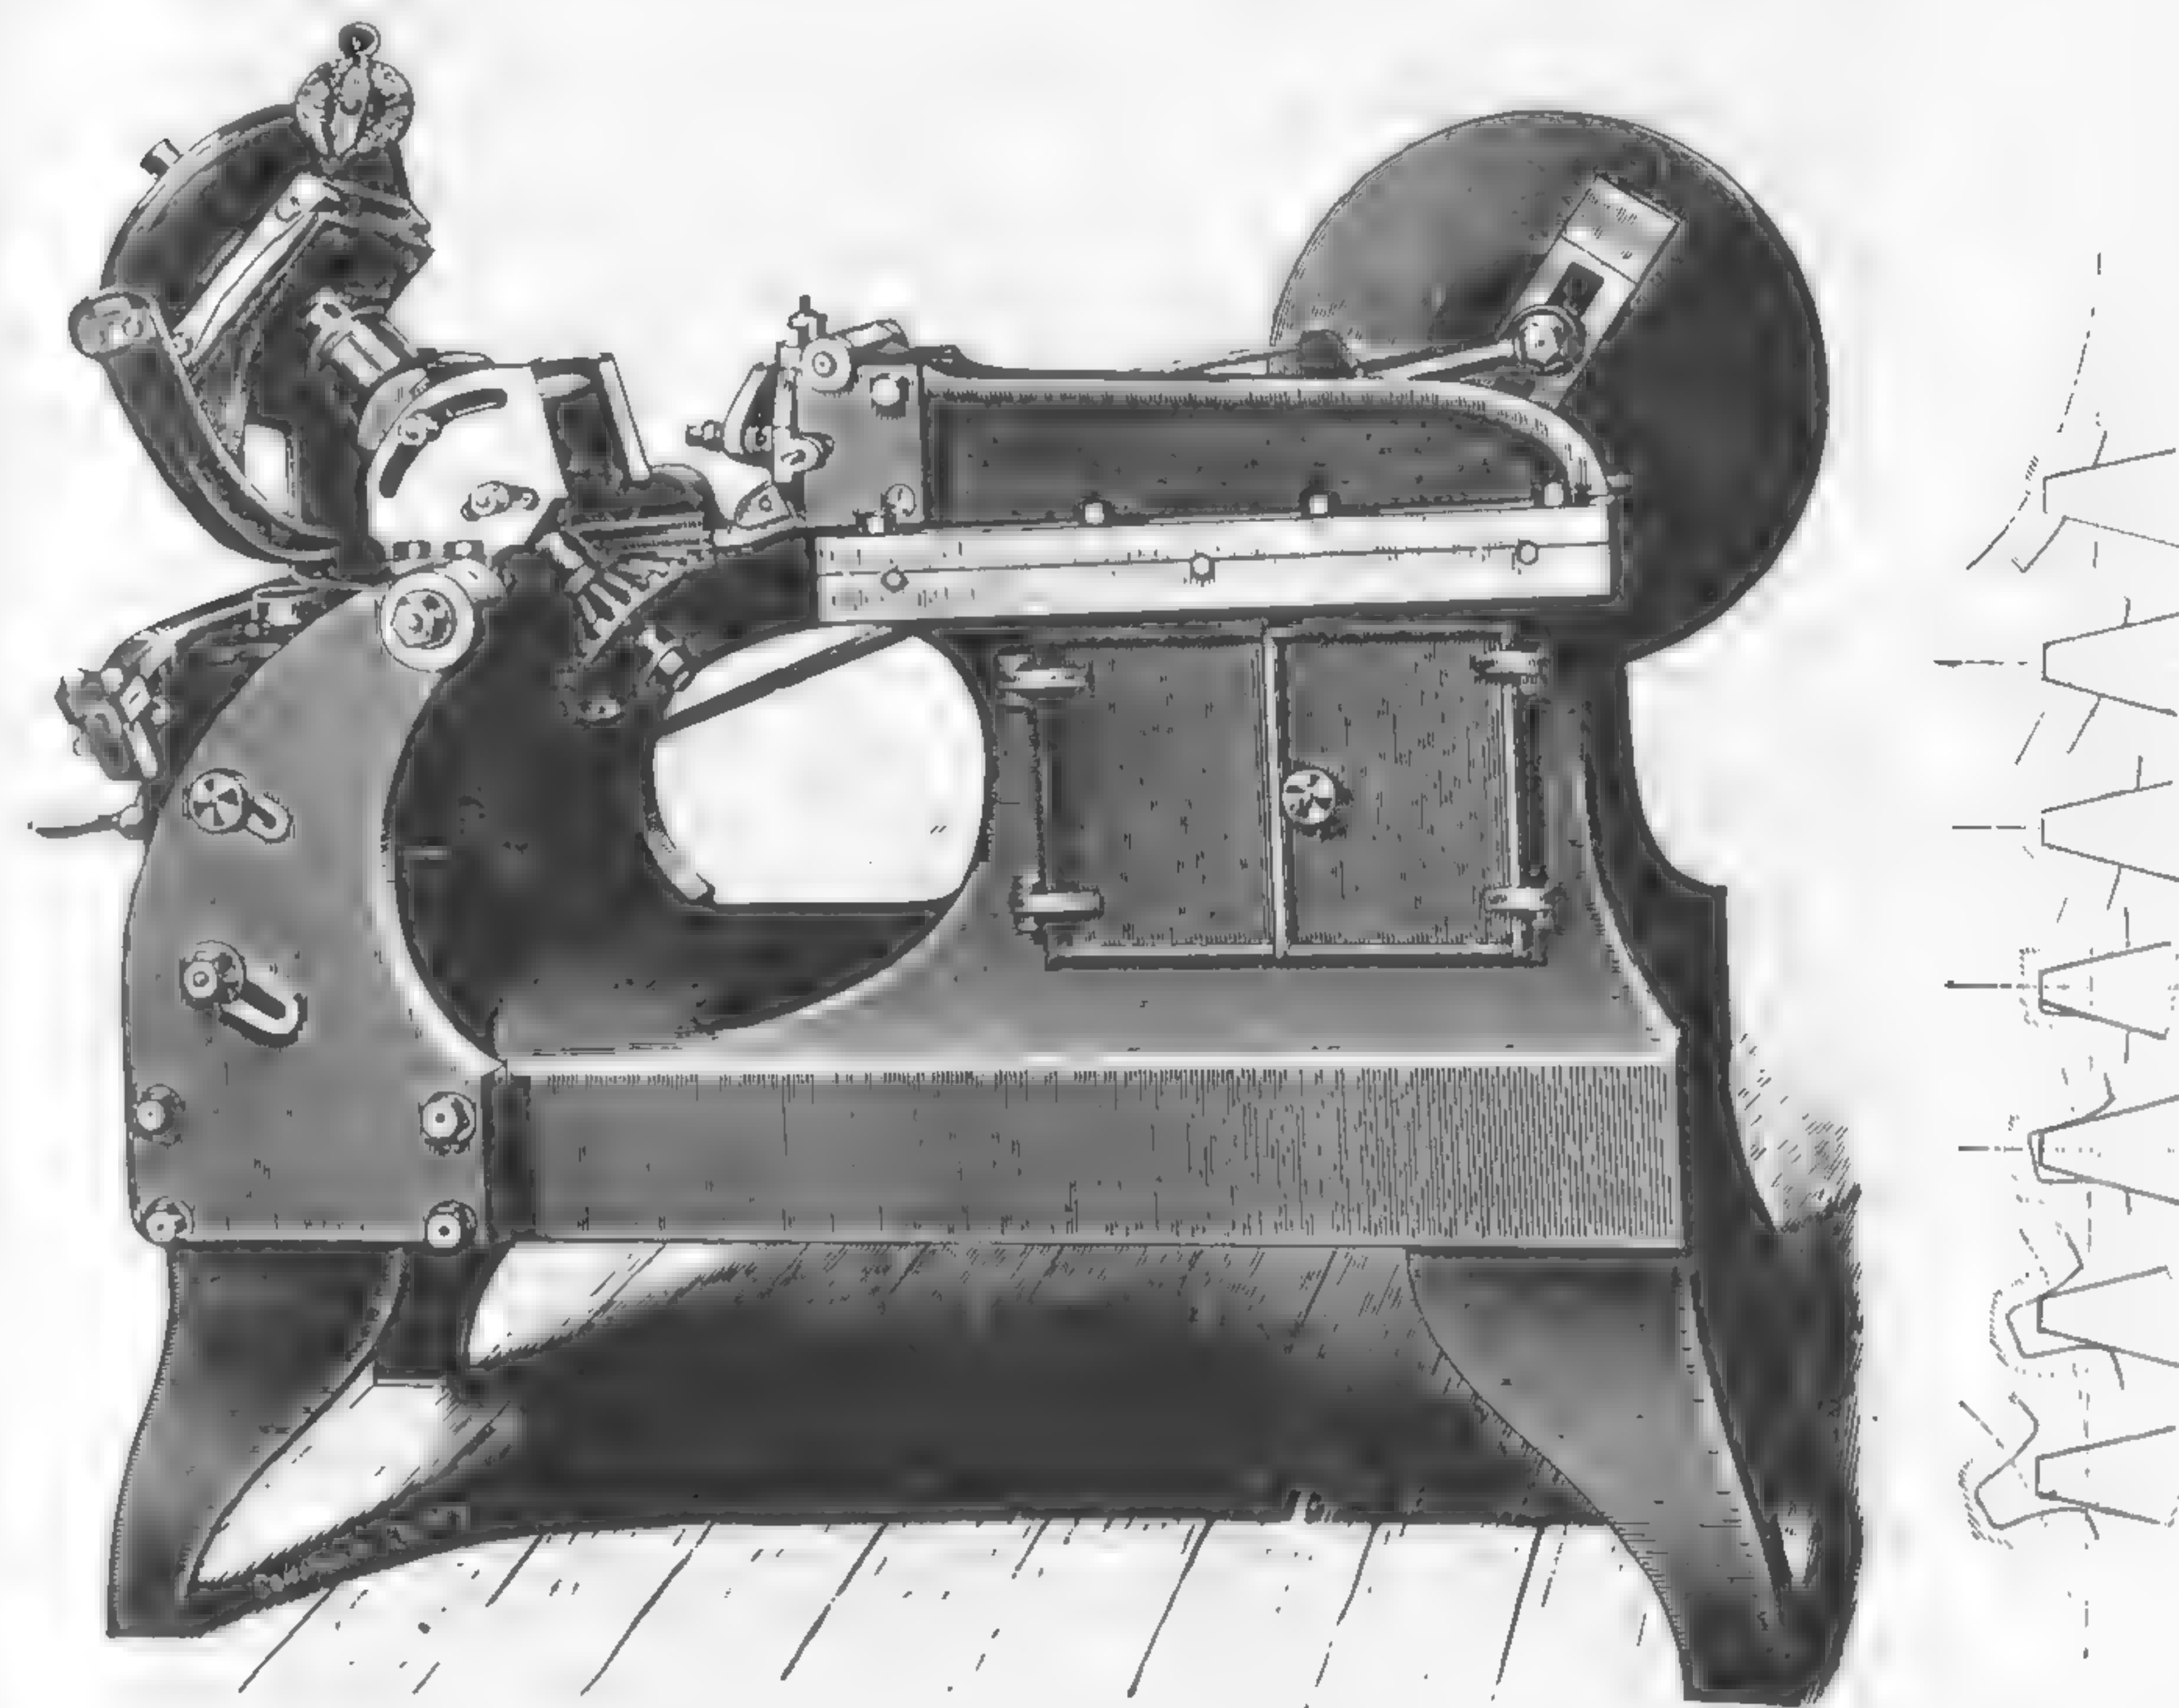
BILGRAM'S BEVEL-GEAR CUTTING MACHINE, 1885
